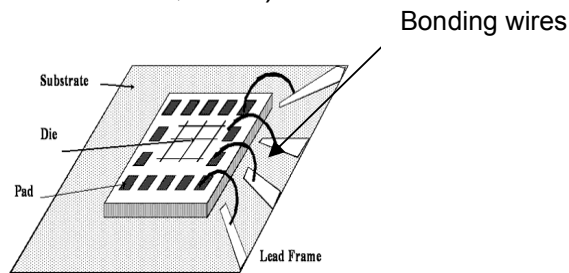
Wire bonding packaging technique (source: UoP, 2012)
